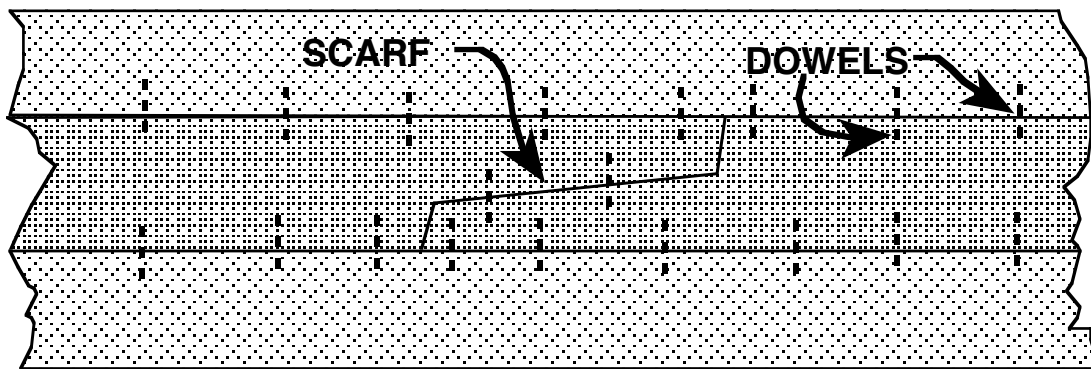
Detail of scarf joint and dowel placement in hull planking of *kumpits* under construction at Sibutu.
